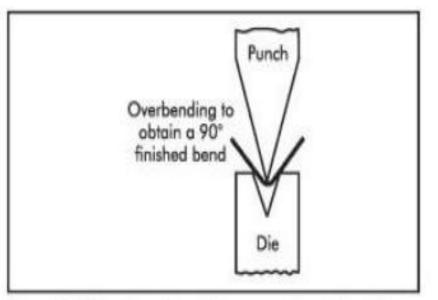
Simple tooling of the type used to air-bend sheetmetal parts in press brakes. The upper die is lowered a little and a hit is made until the desired bend angle is obtained.
